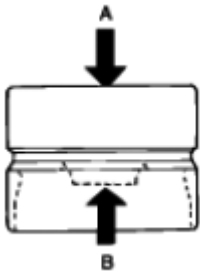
Pressing HLA (Hydraulic Lash Adjuster)
